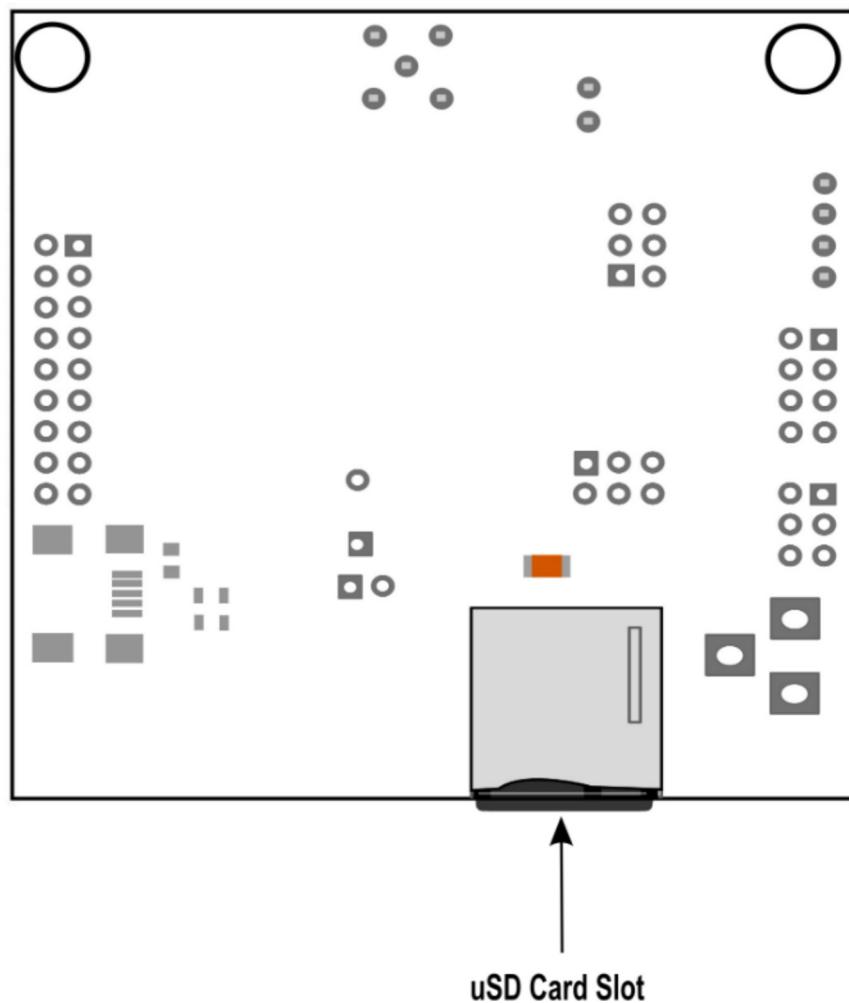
Bottom View of SIM800 GSM/GPRS Dev kit with uSD card inserted.
